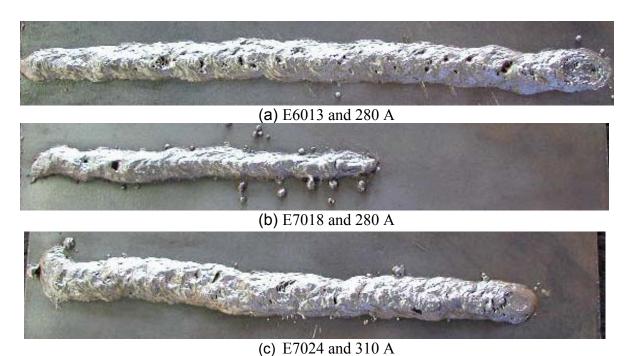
Pictures of the bead-on-plate wet welds deposited with the three electrode types with electrode positive on A572 Gr. 50 steel plates at 100 m.
